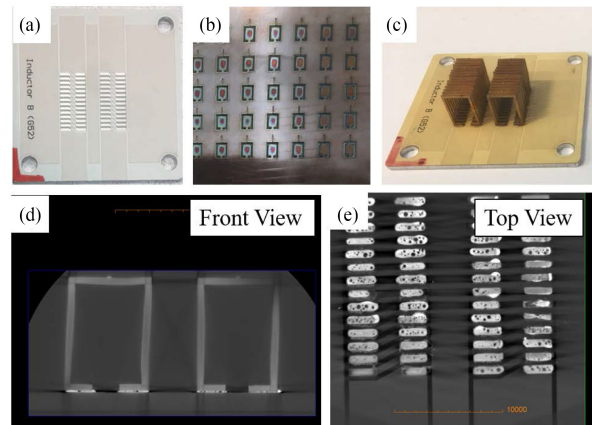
Inductor manufacturing steps. (a) IMS with patterned copper. (b) Laser-cut copper U-shapes. (c) Windings after U-shape placement. (d) and (e) x-Ray CT scan front and top view of the windings.
